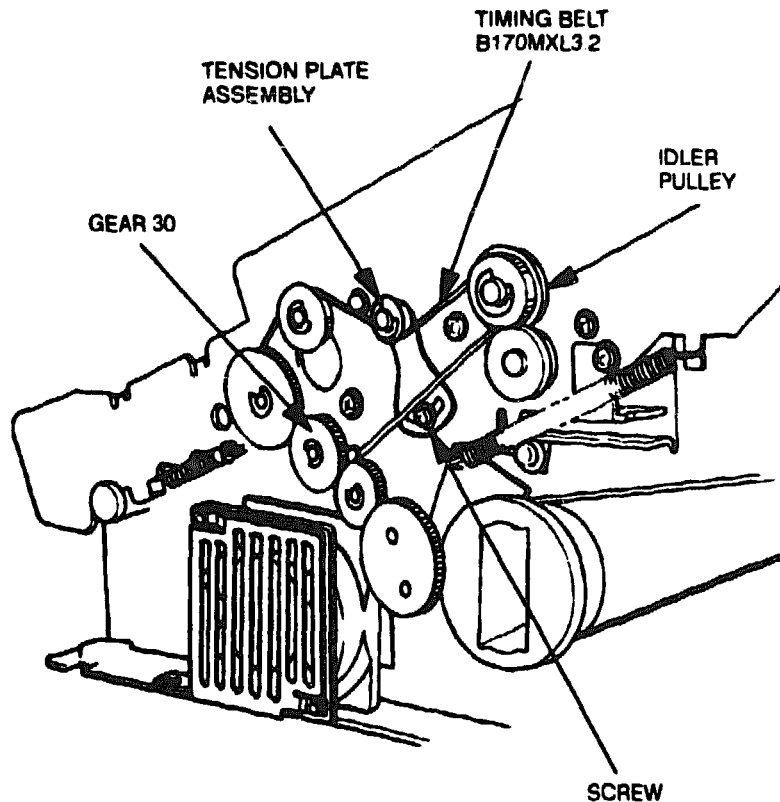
Tension Plate, Gear 30, and Idler Pulley
